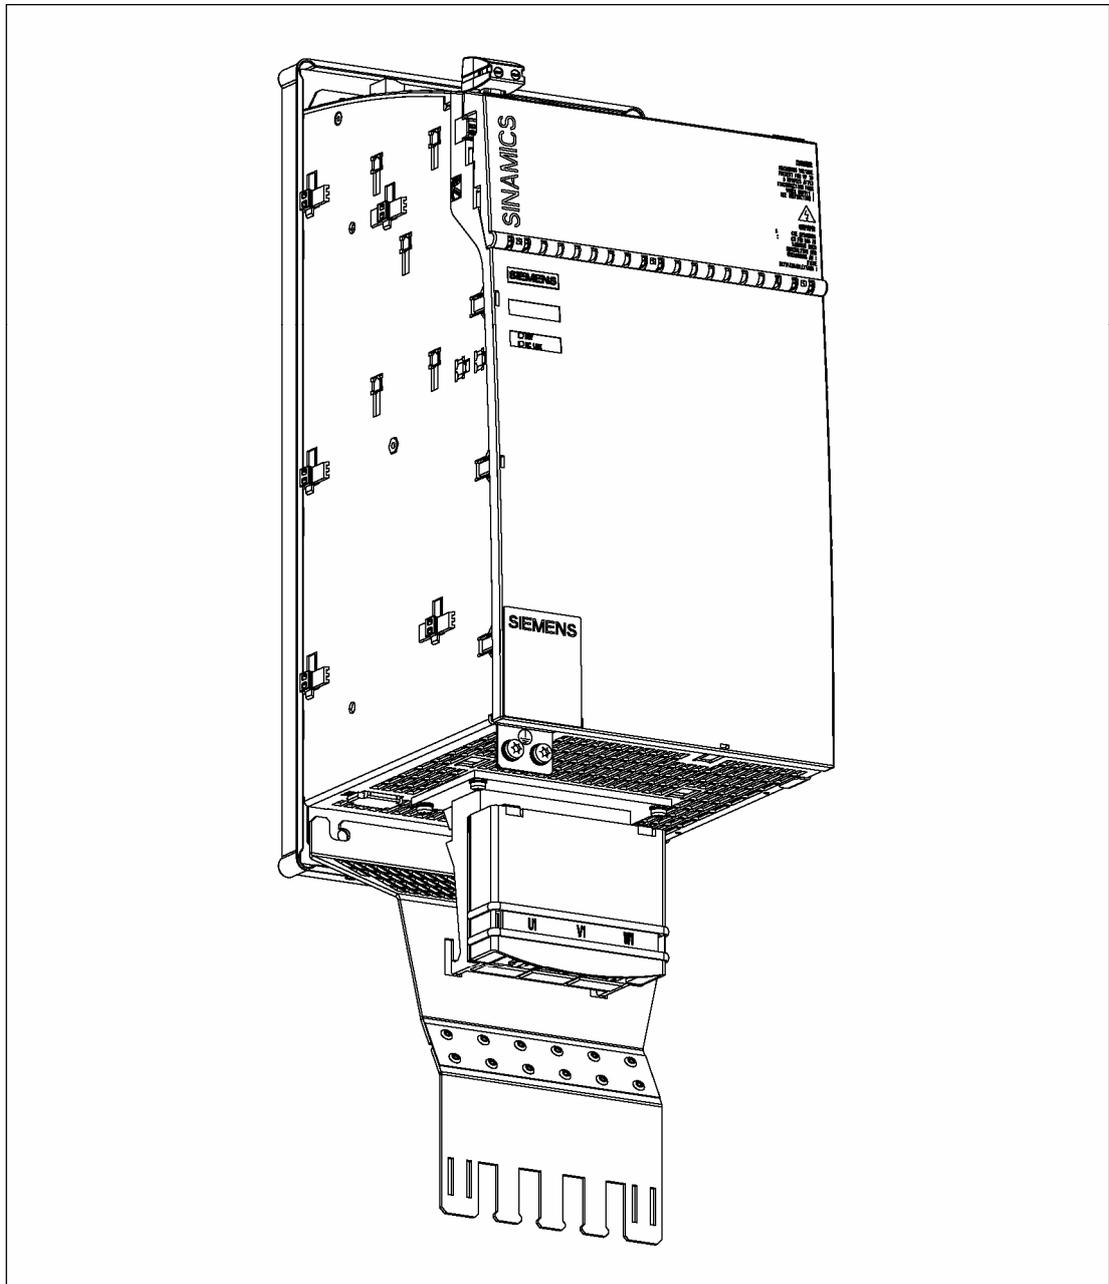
Shield connecting plate for a 200 mm module with with a cold plate
